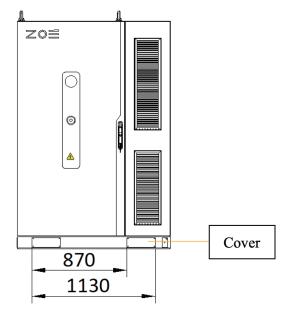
Dimensions of Forklift Holes in Cabinet
